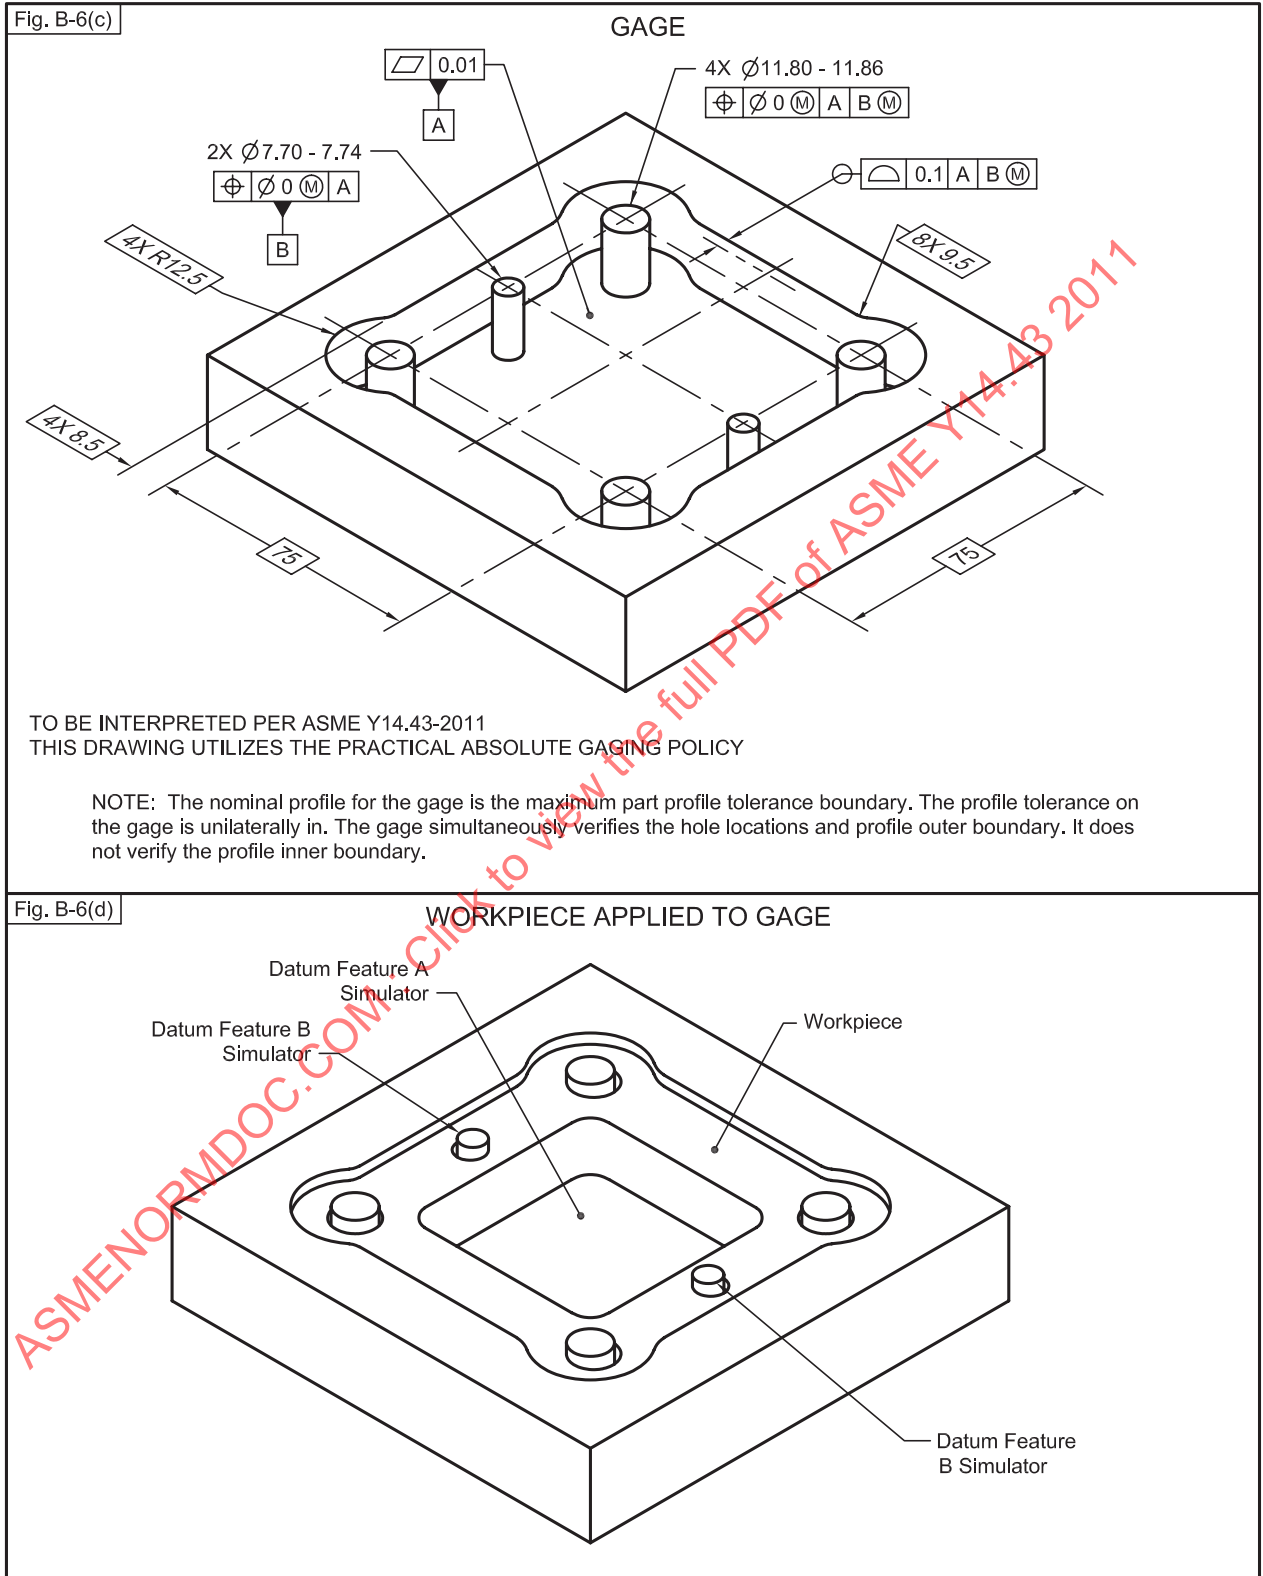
Simultaneous Position and Profile Tolerances (Cont'd)
